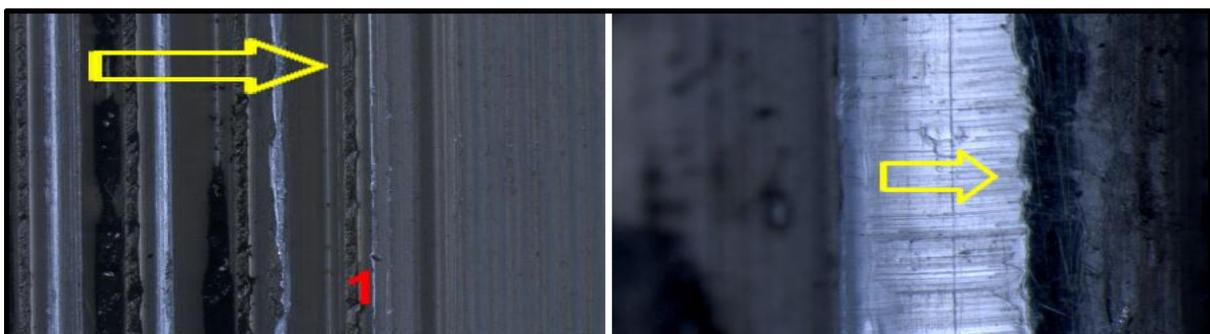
Cylinder threads condition. (Photo 6: stereo/digital)
